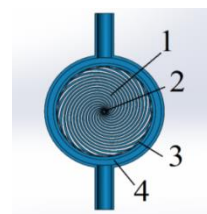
Cold heat exchanger in section: 1 – spiral plates; 2 – a rod that closes the hole between the plates in the center; 3 – a sealant layer that fastens the plates; 4 – a cylindrical channel for water circulation
